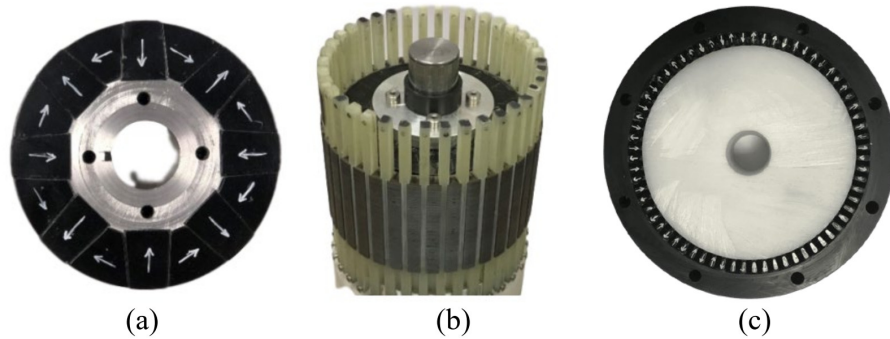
The prototype constructed in [198] showing the (a) full assembly of the inner Halbach rotor, (b) the cage rotor, and (c) the half assembly of the outer Halbach rotor.
